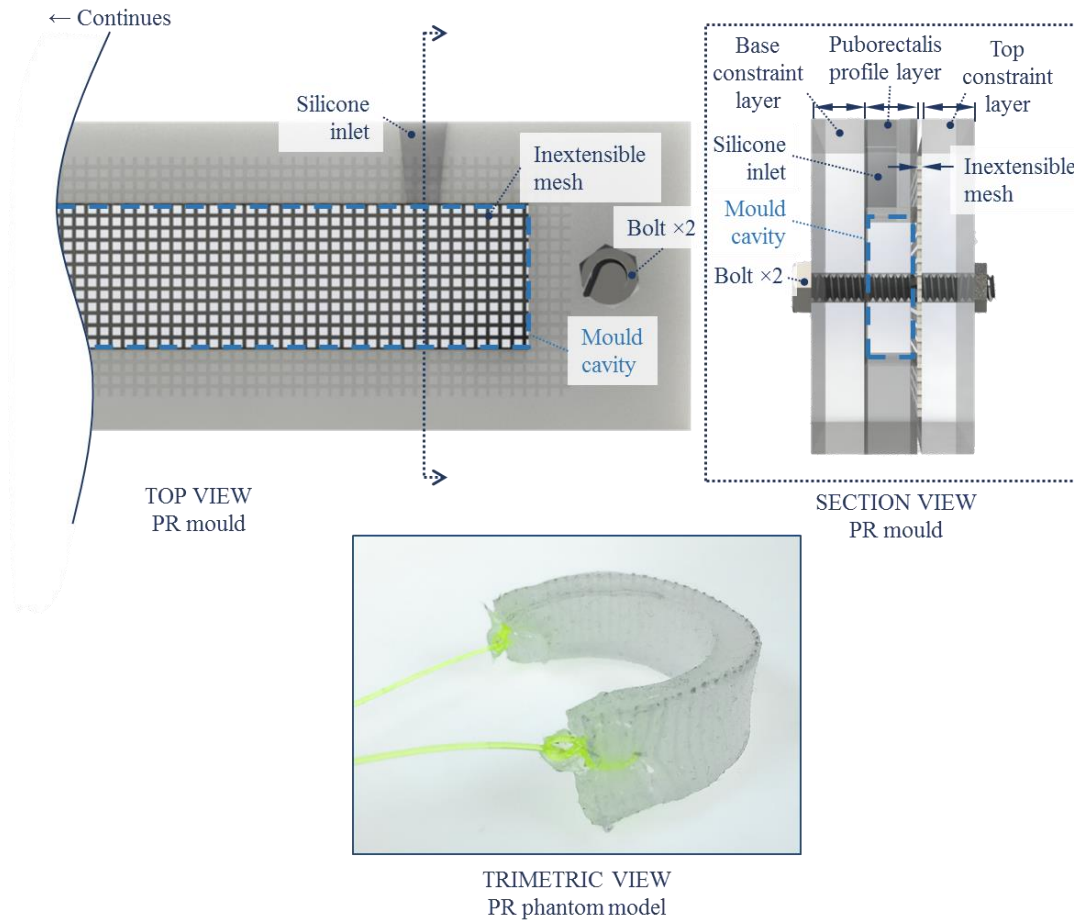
Top*; SolidWorks renders of the mould used to fabricate the PR muscle phantom and *bottom*; image of the fabricated part, trimmed down and fitted with nylon wire.
